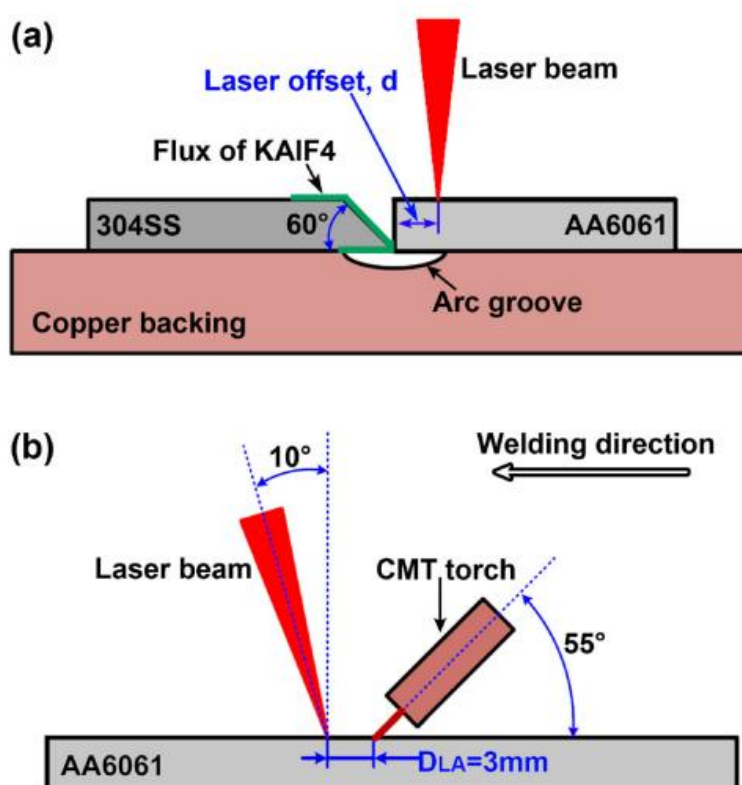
Set up of laser welding process for the investigated hybrid welded joint done by Gao [16].
